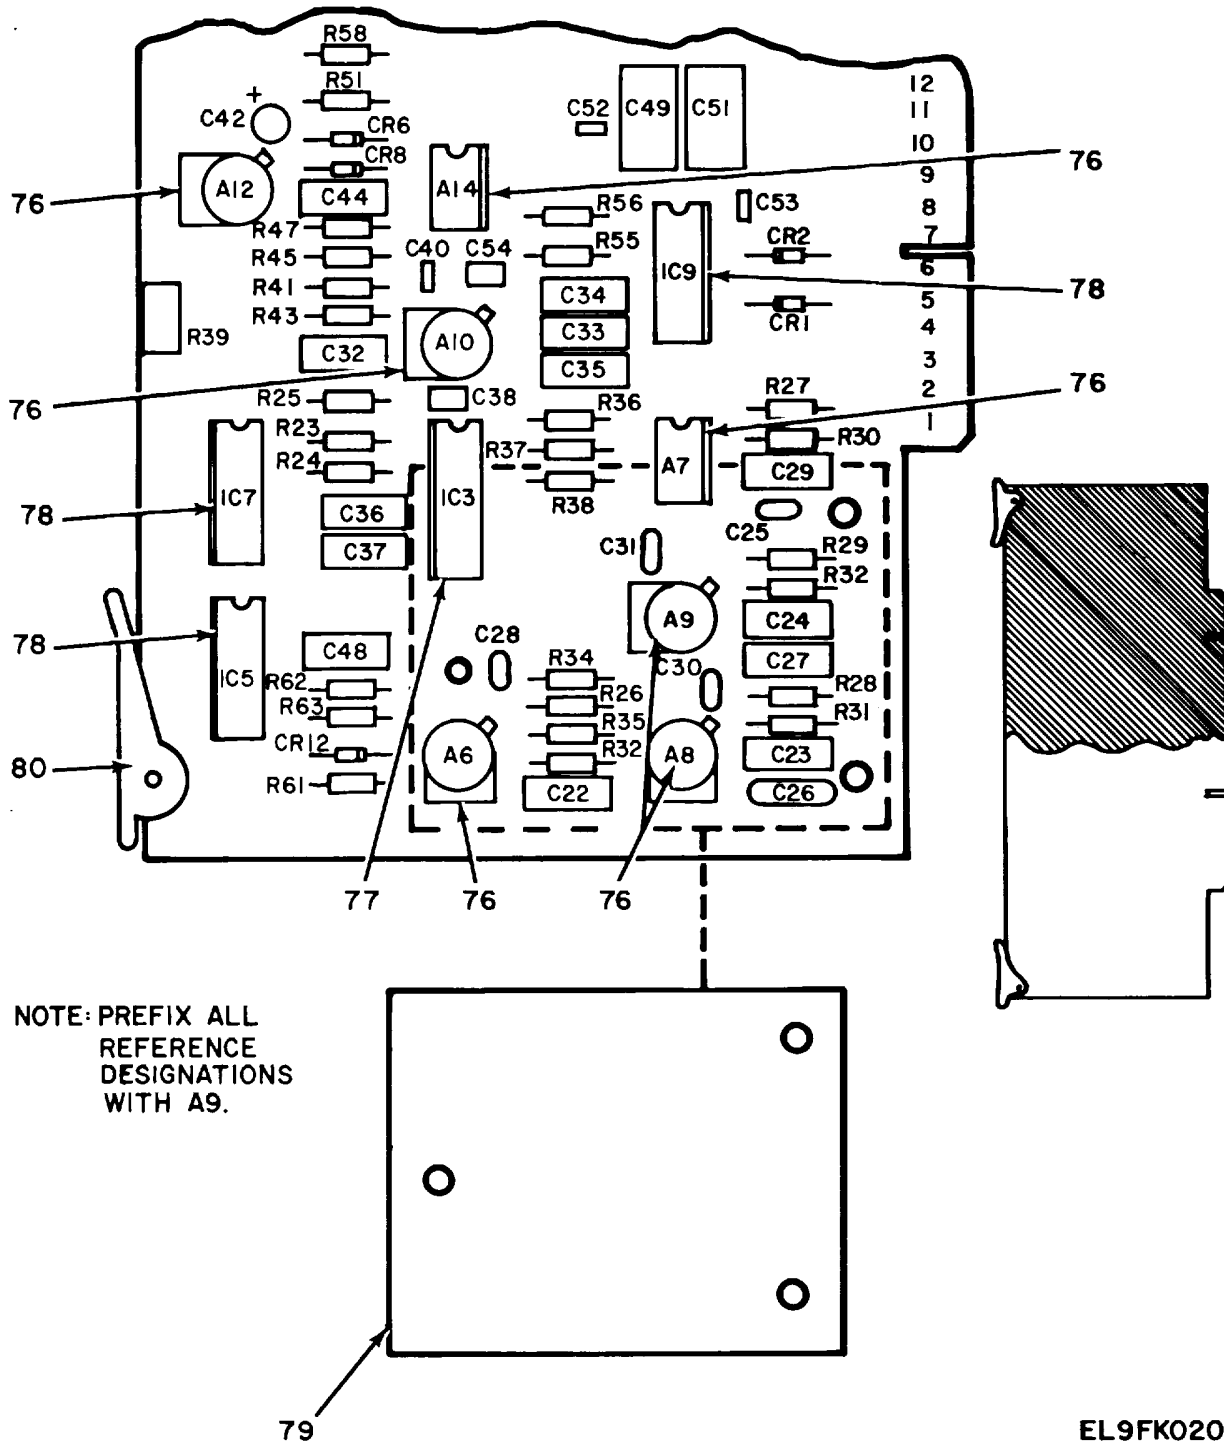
CIRCUIT CARD ASSEMBLY, AUDIO (A9), (SHEET 2 of 3)
